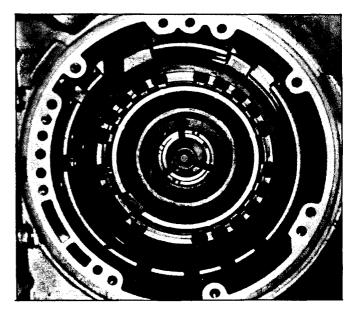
G-70 Compressing Low and Reverse Clutch Piston
